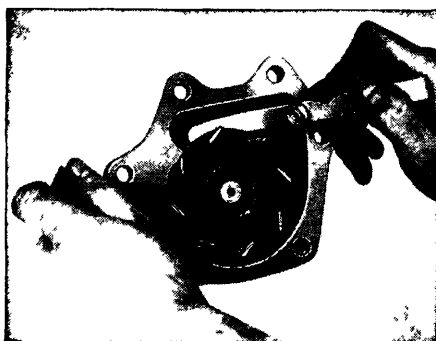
D Checking clearance between face of impeller and pump body. Clearance should be from .010" to .035". 1937-52
